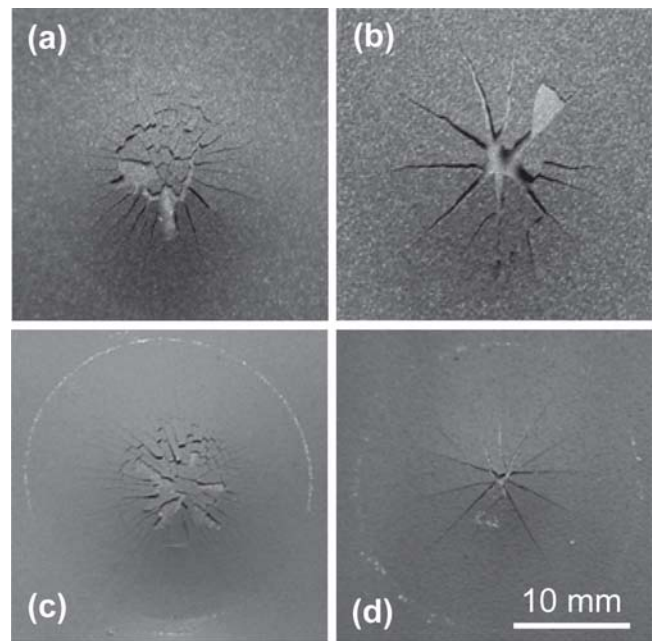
Top views of the specimens tested in ball punch tests. (a) HVOF formed Inconel 625 coating. (b) HVOF-625 coating with a self-flux alloy primer. (c) LS-HVOF No. 3 formed alloy 625 coating. (d) LS-HVOF No. 3 formed Inconel 625 coating with a self-flux alloy primer
